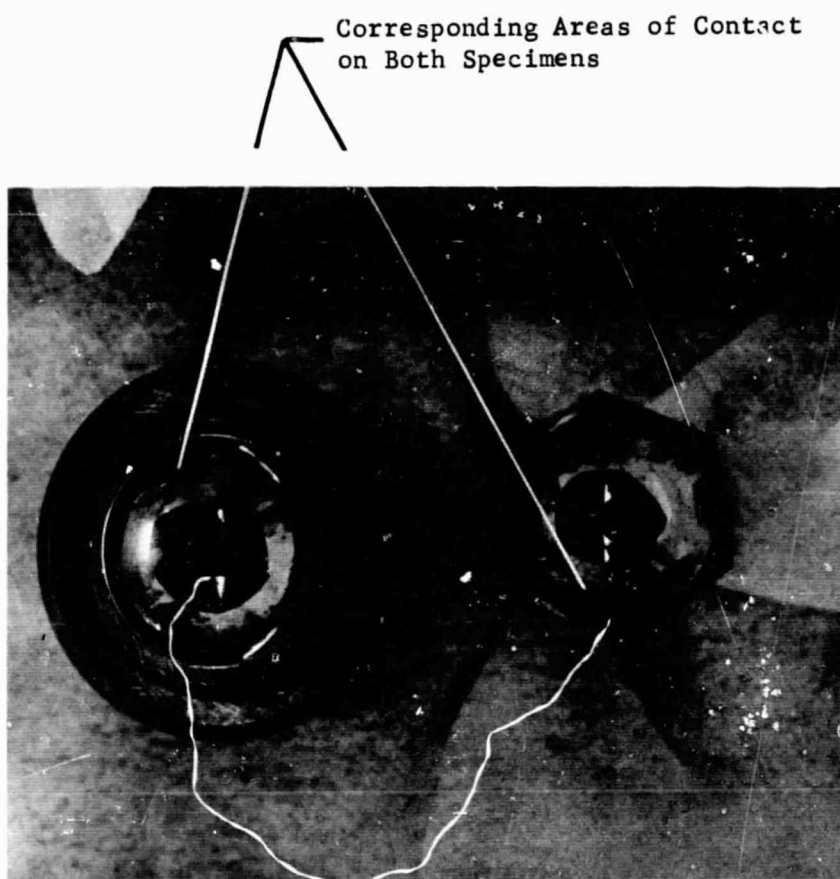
Photograph of the BRU conforming geometry. Tungsten carbide vs. Tungsten carbide; Specimen No. 113; Mag. 3x.
